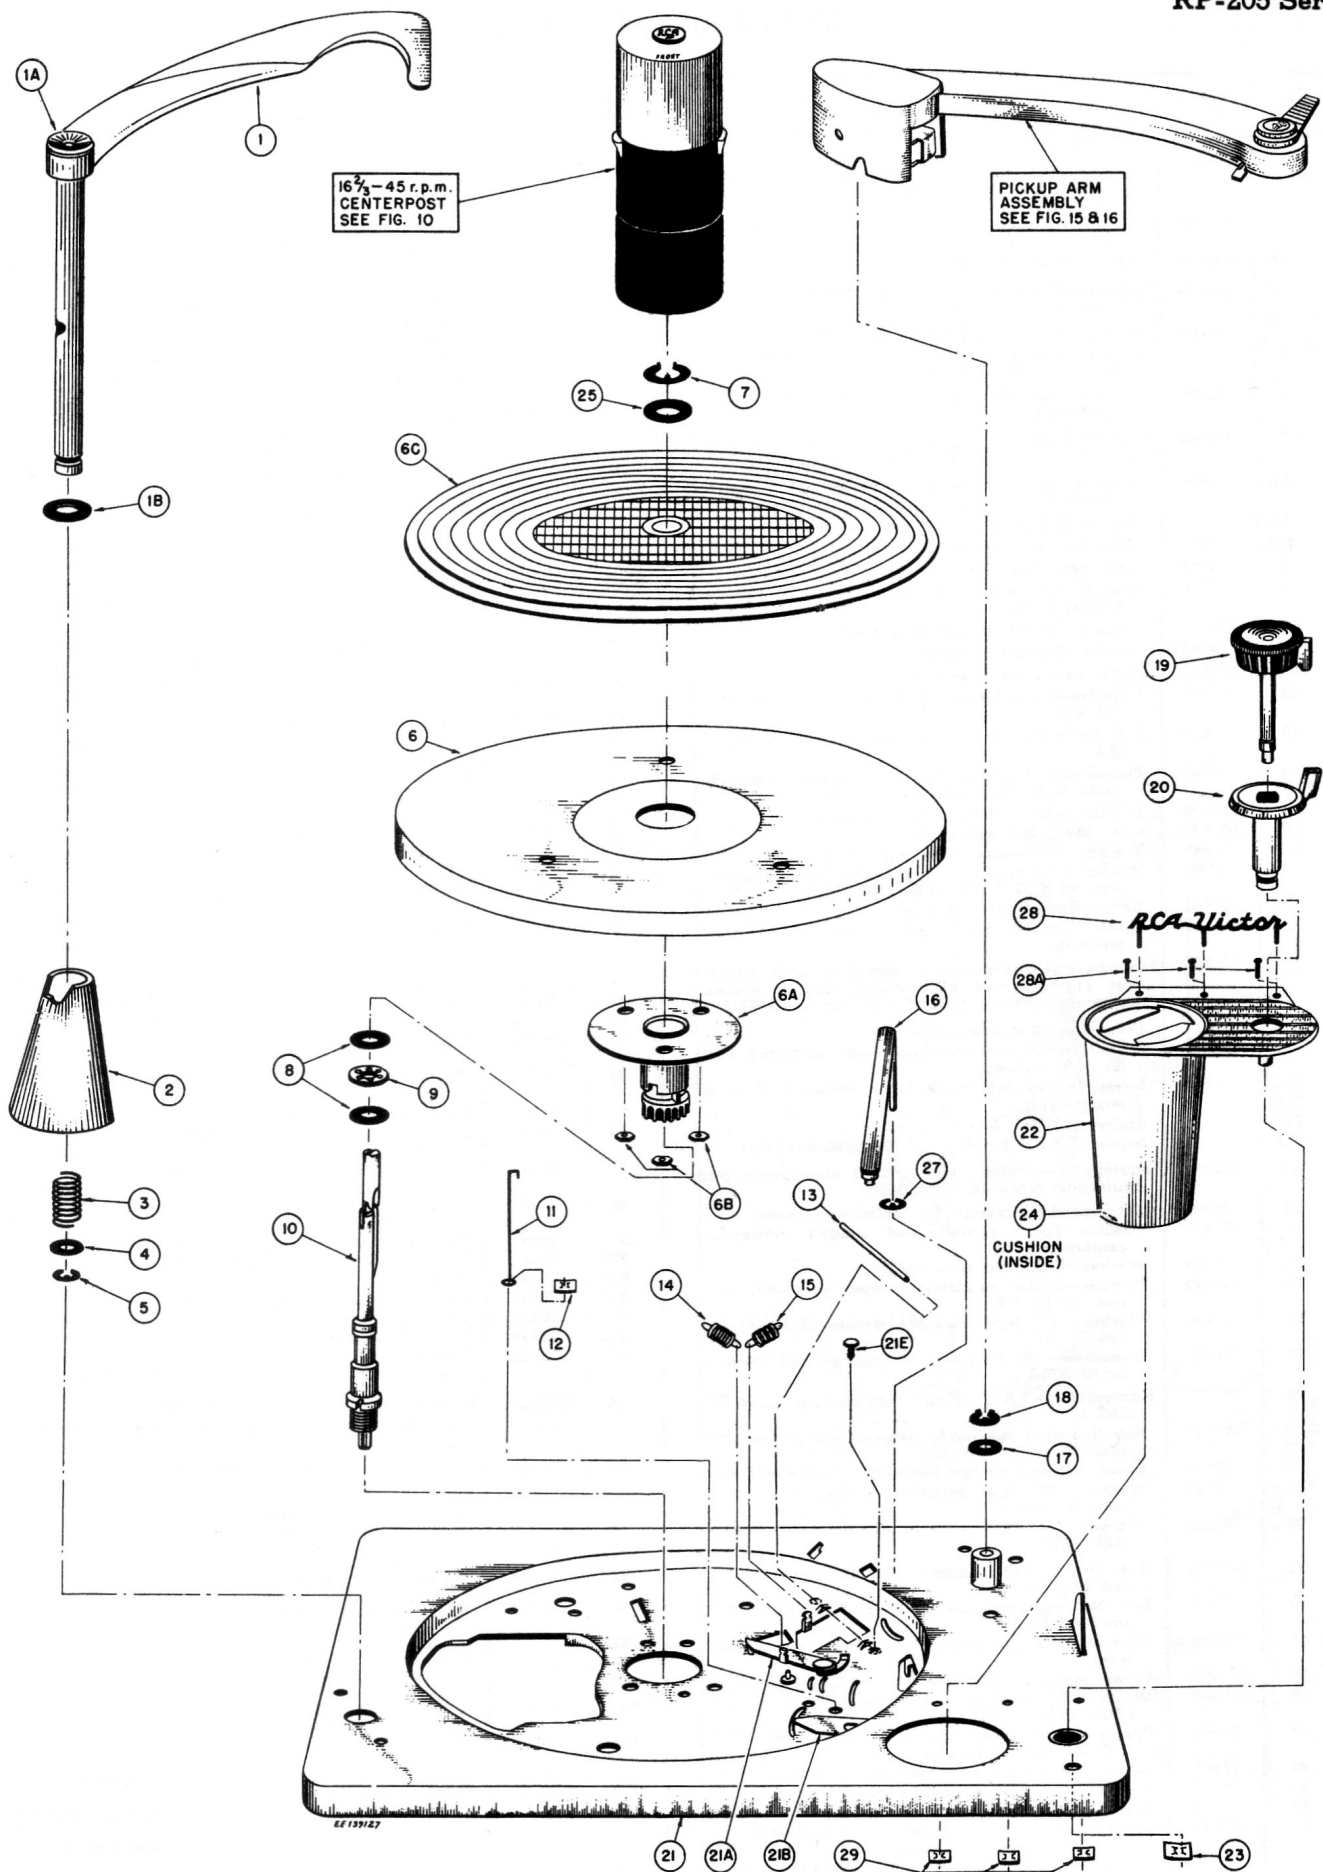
A—Exploded View Showing Mechanism Parts Above Motor Board
